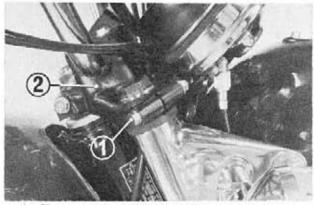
(1) 7 mm flange bolt (2) Fork top bridge
